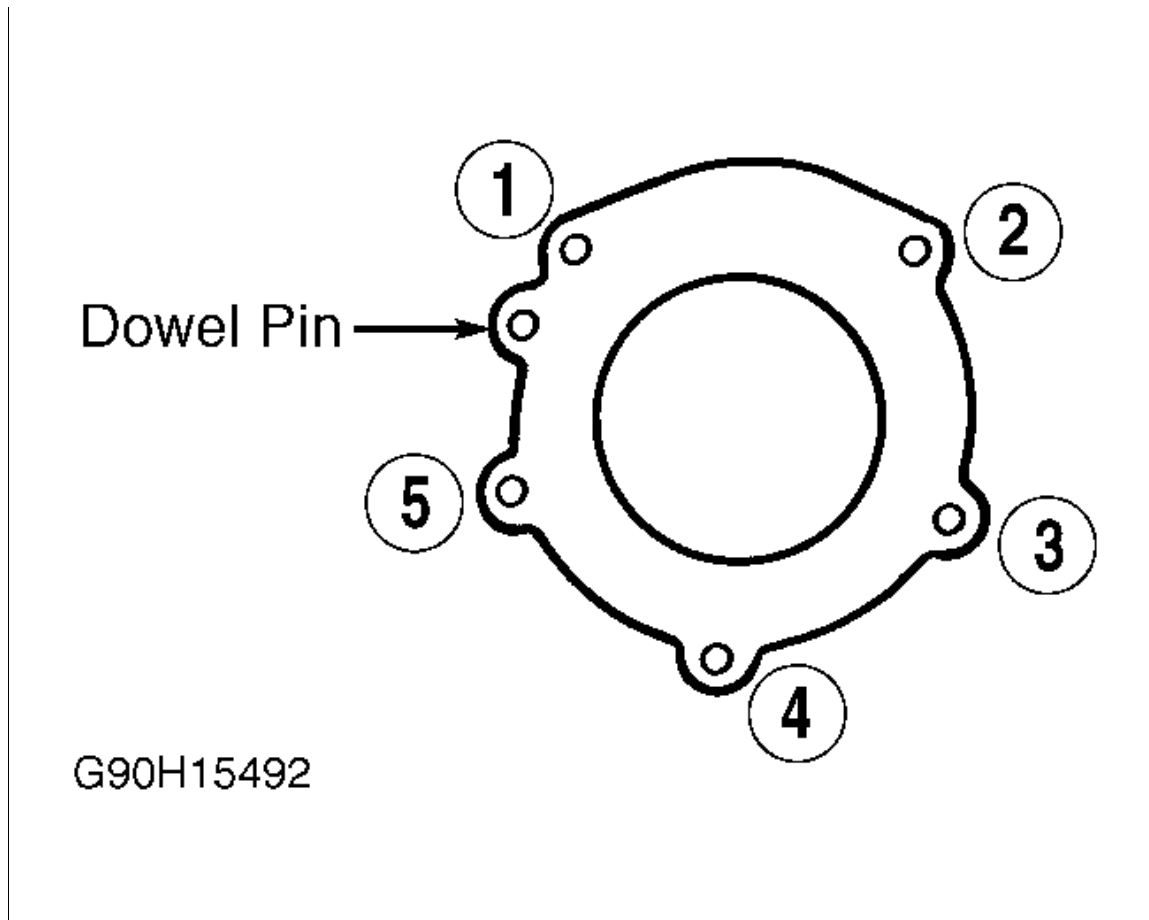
Transfer Case Mounting Bolt Tightening Sequence (1354)
